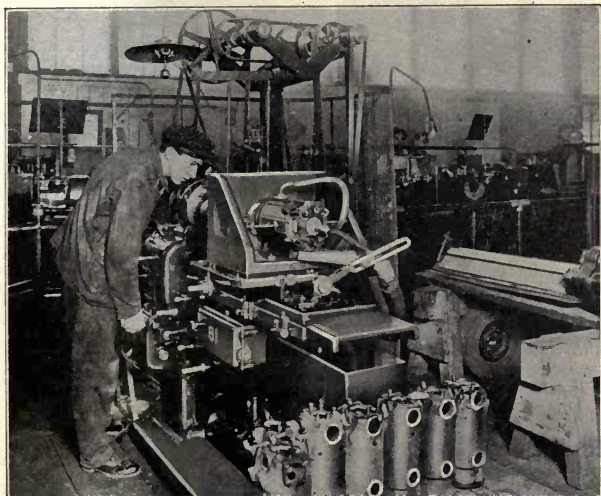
Grinding Hall-Scott airplane engine cylinders on a Heald cylinder grinding machine.
